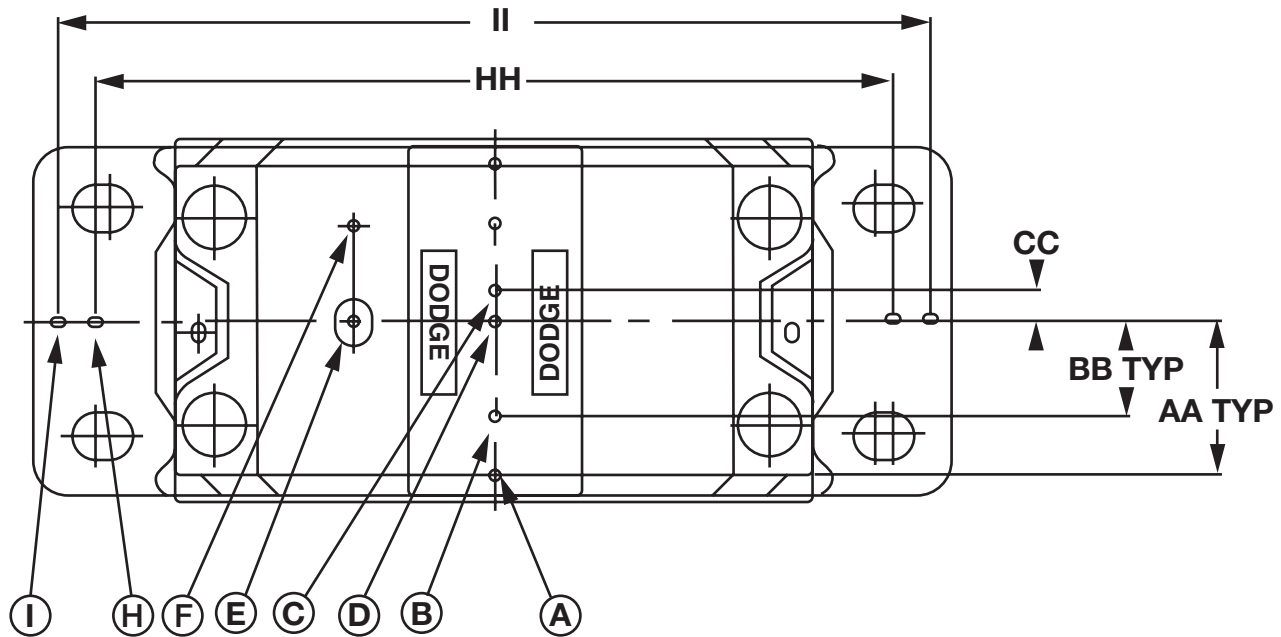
USDAF Housing Dimensional and Descriptive Drawing
